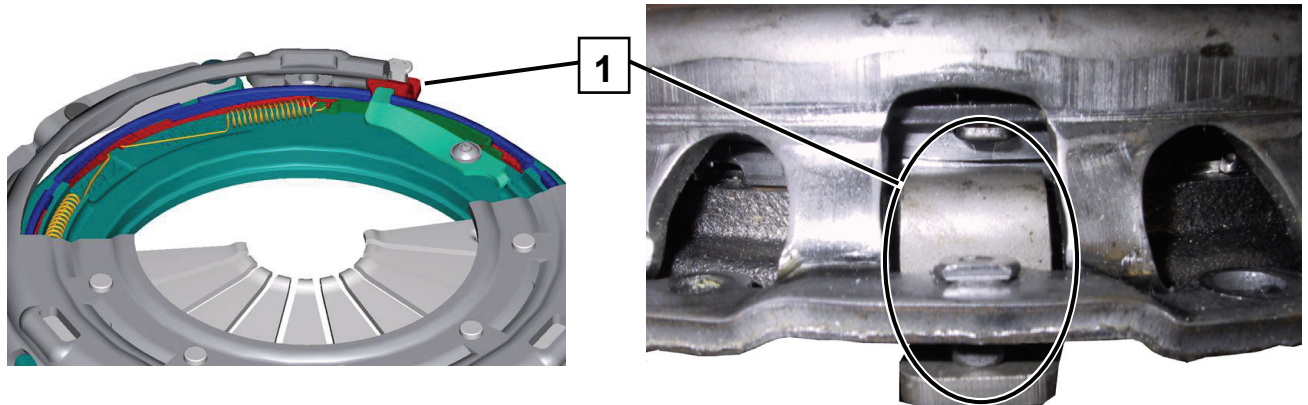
The housing stop [1] is not fixed in the delivery condition. When screwing the clutch pressure plate onto the flywheel the catch is locked and is fixed thereafter.
